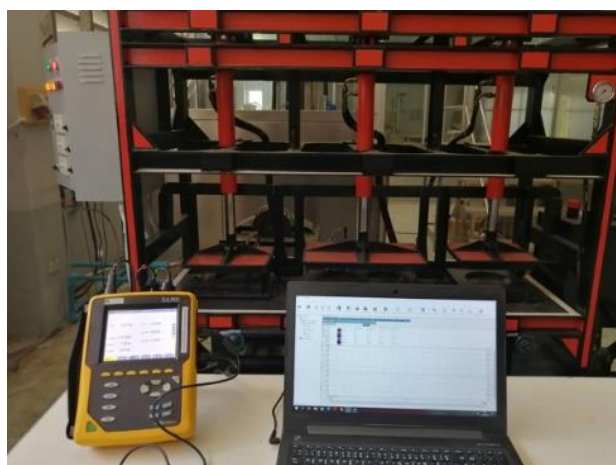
The measurement of electrical consumption when operating the hydraulic compression molding machine
